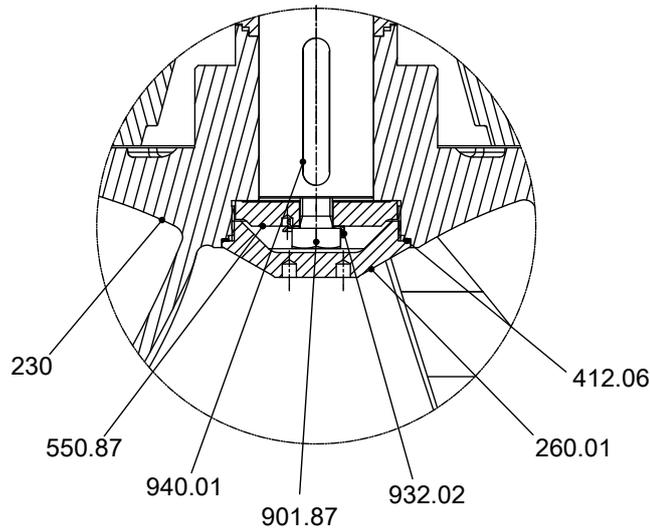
Impeller fastening elements, sizes 1000-420, 1000-500, 1200-630
